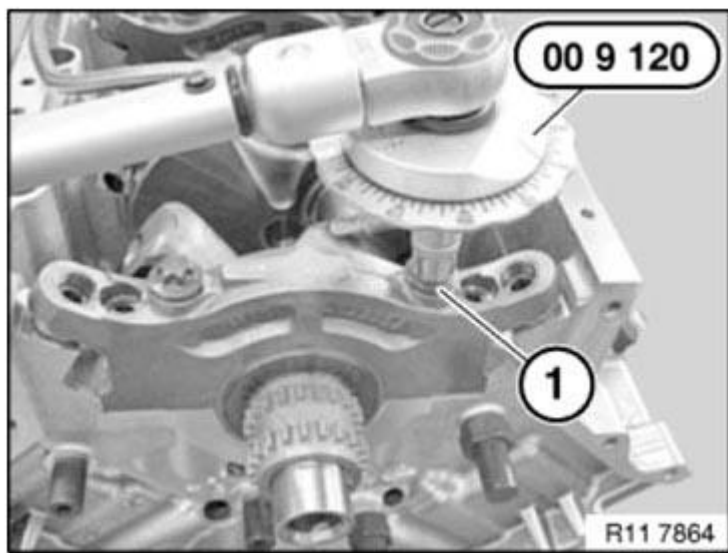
Securing Collar Bolt With Special Tool 00 9 120
